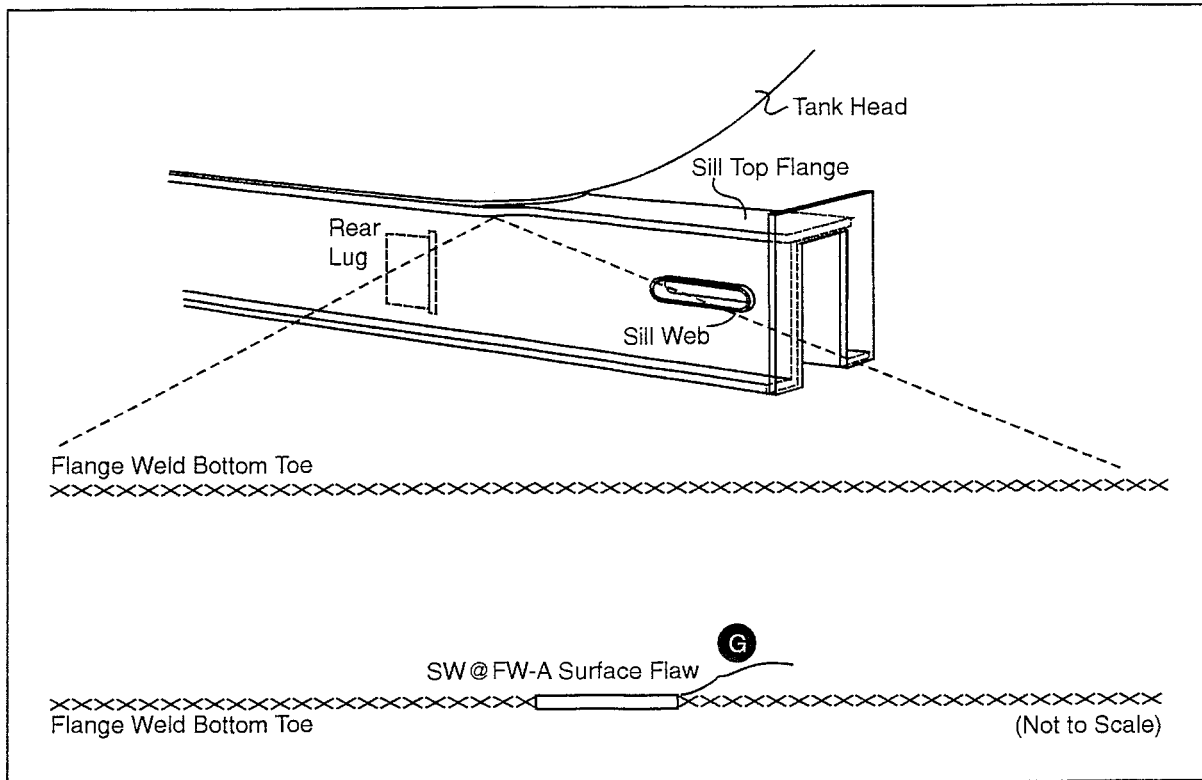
A-end Right Flange Weld Crack and Preflaw
